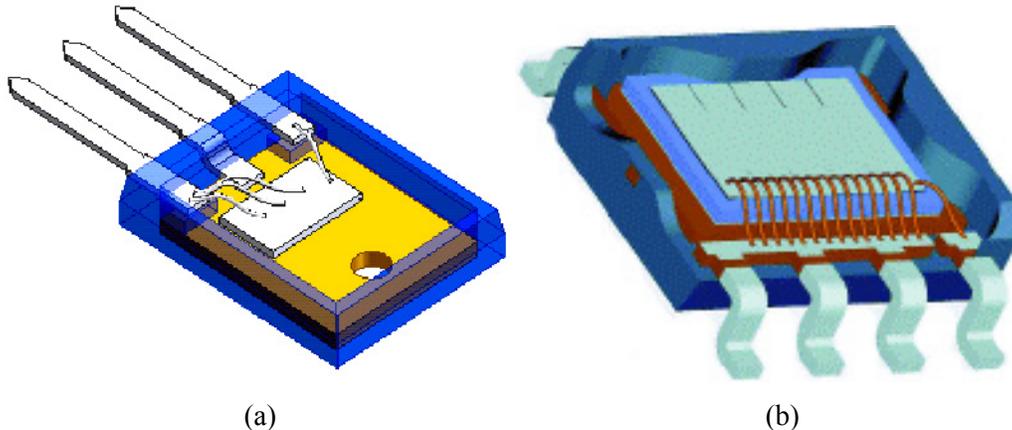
Top views of the wirebond TO-247 (a) and SO-8 (b) MOSFET packages.
